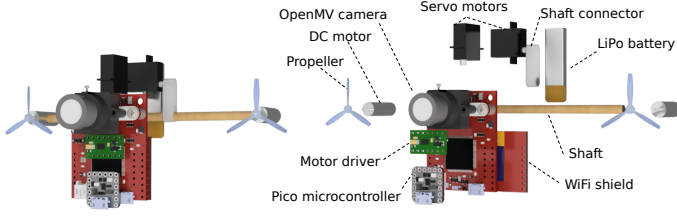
CAD model of robotic blimp gondola showing the assembled and exploded views.
